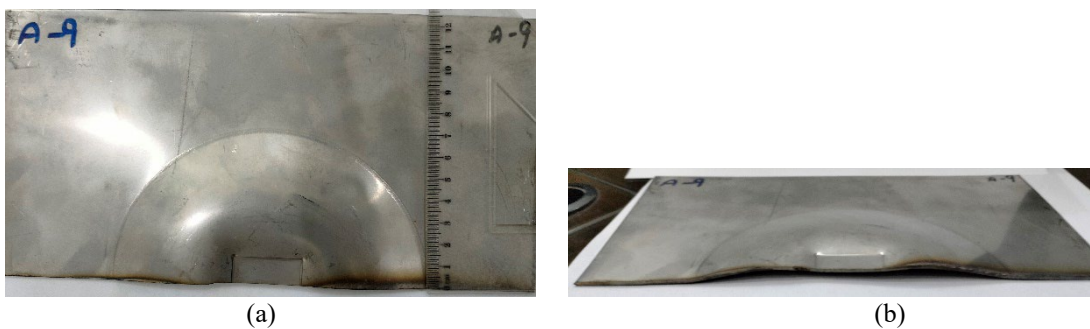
(a) Experimentally deformed driver sheet (SS304) (b) Cross section of driver sheet
